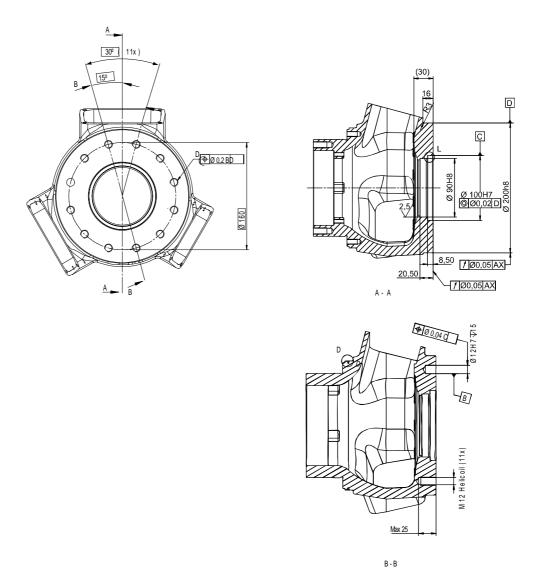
Robot tool flange SS-EN ISO 9409-1:2004 (dimensions in mm).
